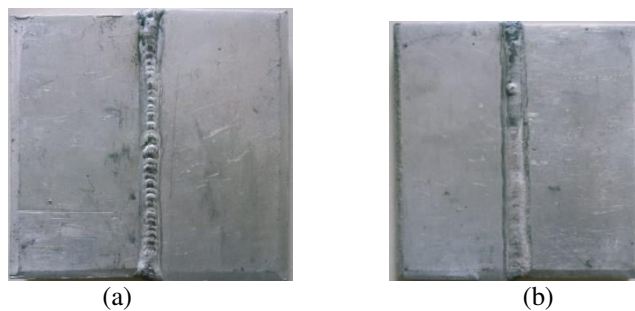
(a)tig welding of aa6061 and aa5052 aluminium alloy at 100amps(b)tig welding of aa6061 and aa5052 aluminium alloy at 83amps
